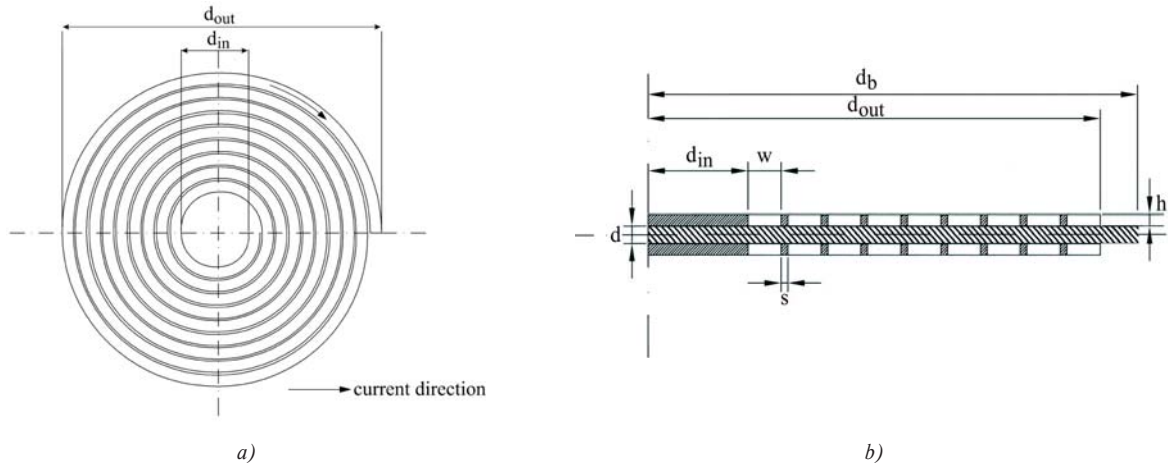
Designed double-layer spiral coil a) top view b) side view
